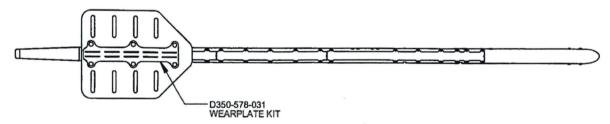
D350-578 Bearpaw Installations (Bottom View)
